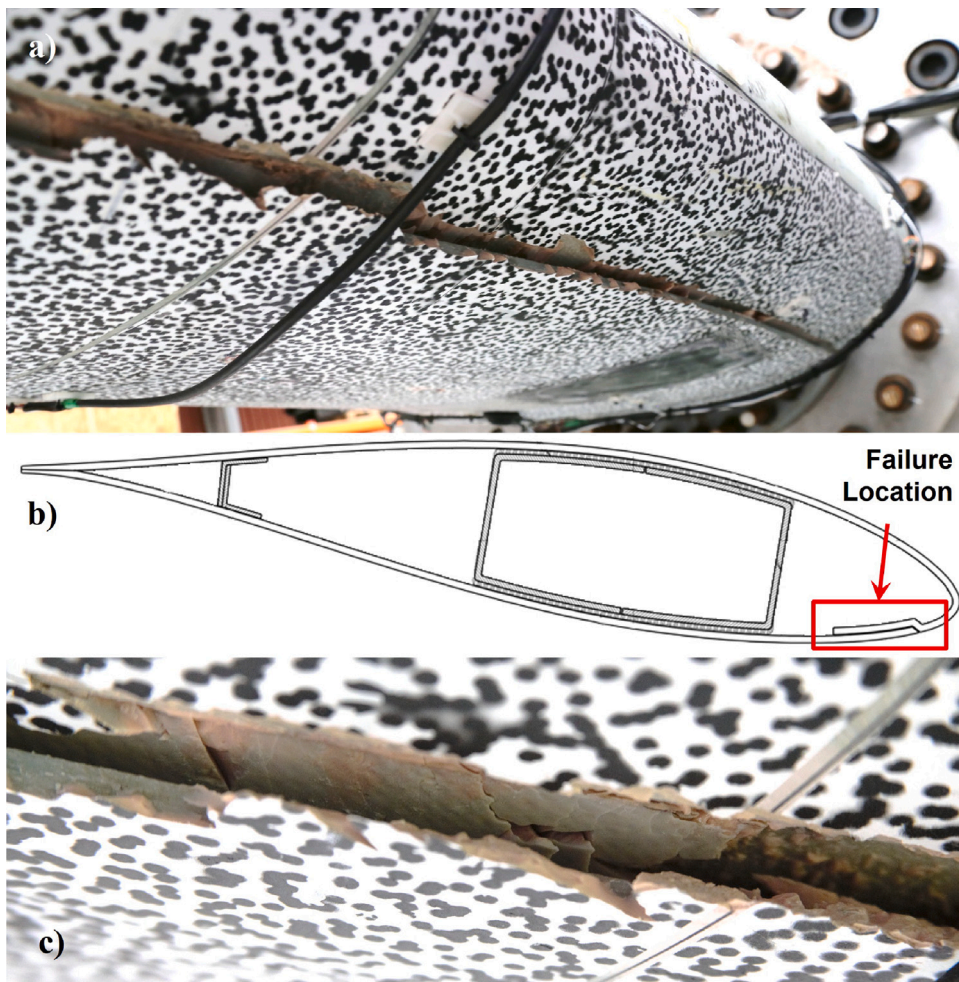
Final blade failure: (a) General view; (b) Failure feature in a section view diagram; (c) Detailed view along the skin seam of the blade.
